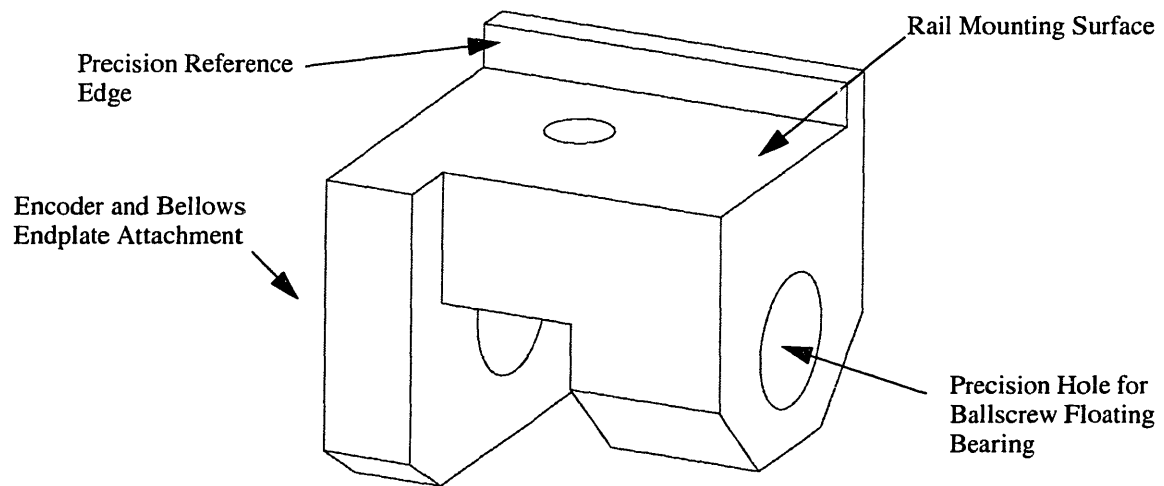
Y-Axis Encoder Mount Bearing Block
